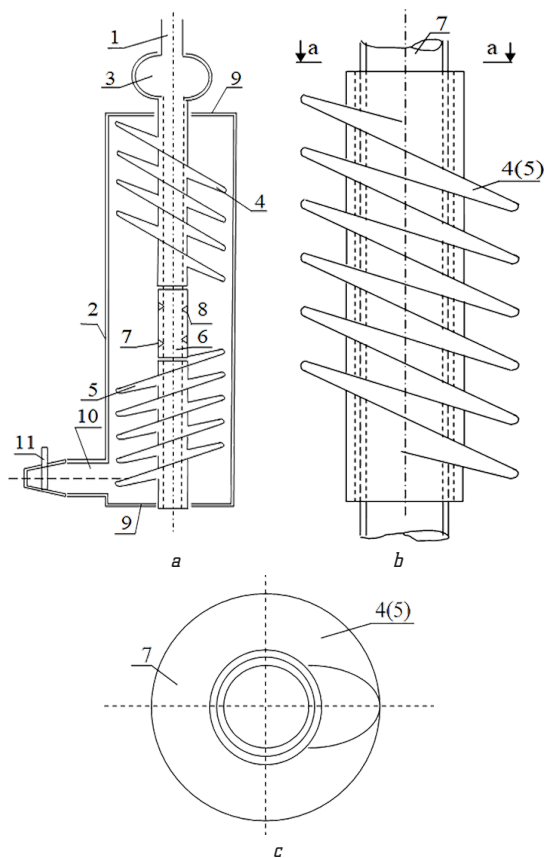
A device for intensifying the spraying of a fluid mixture: *a* – general view; *b* – internal organ; *c* – top view; 1 – mixture supply pipe; 2 – body; 3 – hinged-layer connection; 4 – screw direct action; 5 – reverse screw; 6 – spacer latch; 7 – hollow shaft; 8 – through holes; 9 – plug; 10 – nozzle; 11 – damper
